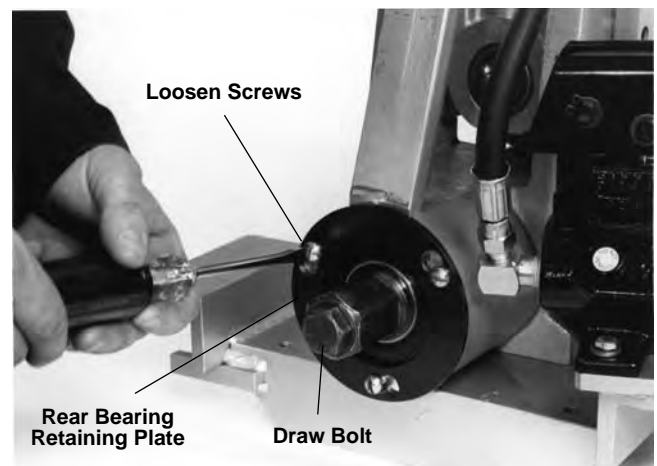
Loosening Draw Bolt and Retaining Plate Hex Screws
